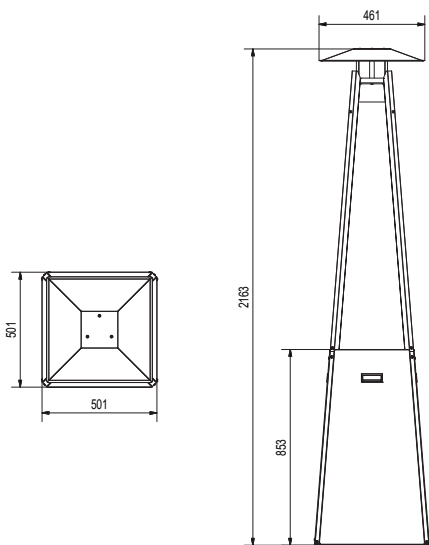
Dimensional drawing of the UMBRELLA versions.
